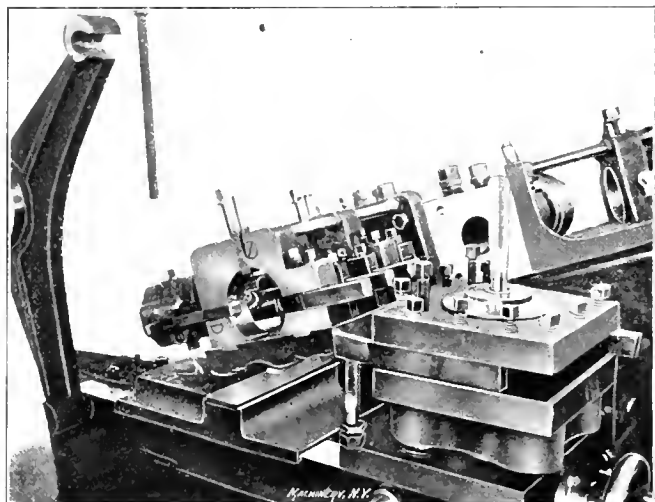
Box Tool and Cutting-off Blade; note Support for Blade.
